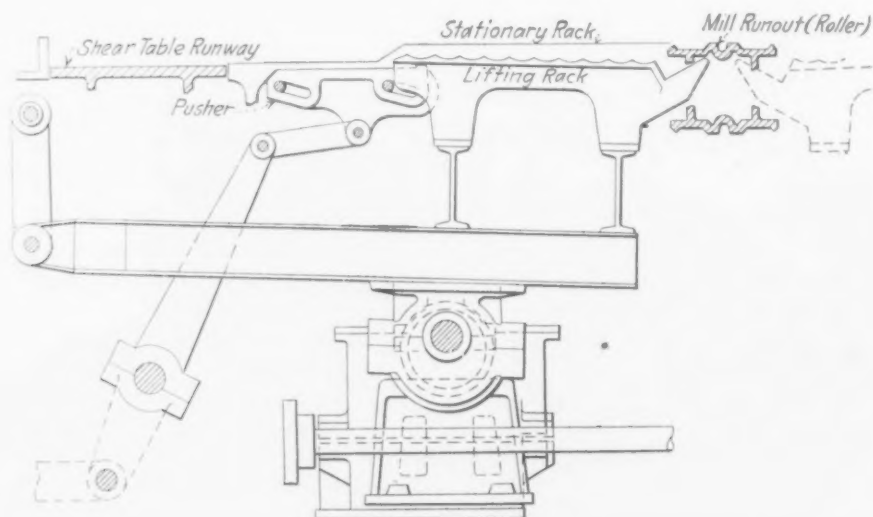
Kinematic Representation of Motion of Lifting Rack, Showing Elliptical Path Taken by Bar in Advancing Across Hotbed from Mill Runout to Shear Table Runway
